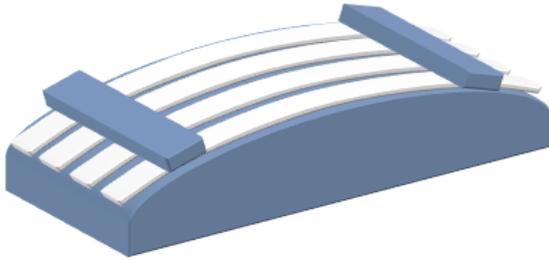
Principle of a Marbone clamp test on POM tensile test bars
